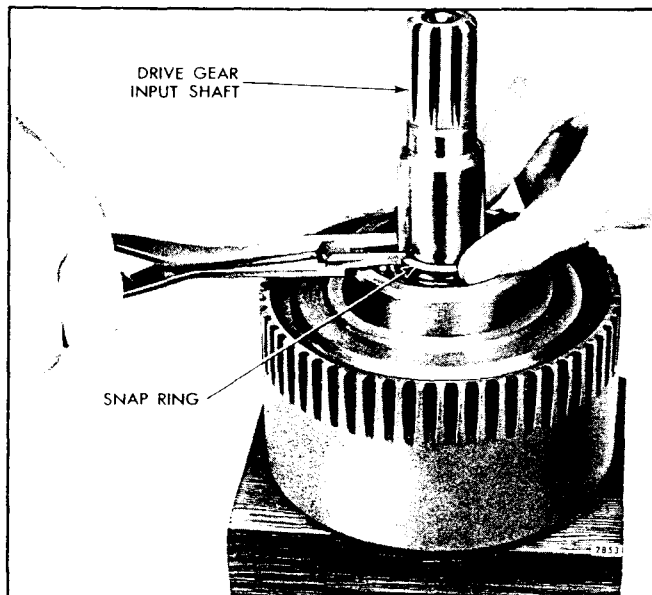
Removing or Installing Snap Ring from/on Drive Gear Input Shaft
